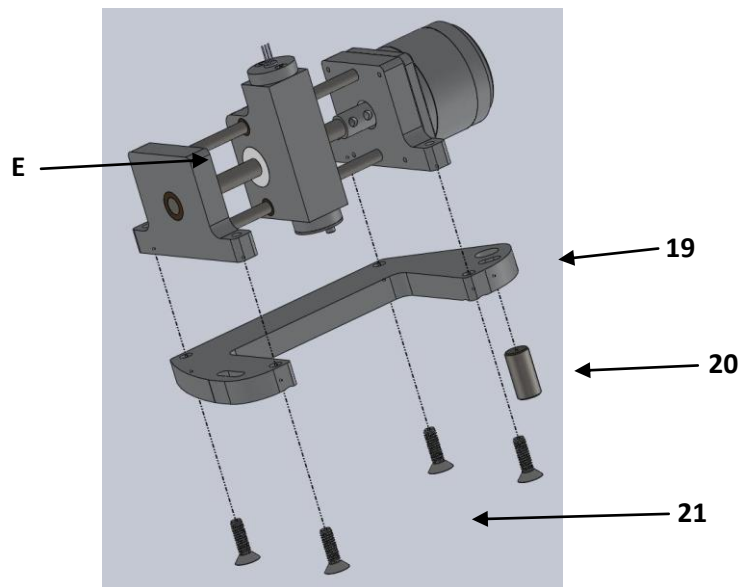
Complete Laser Assembly (F) – (E, 19, 20, 21)
